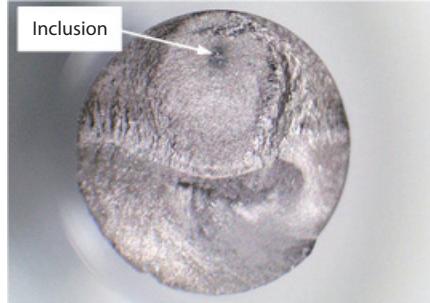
Photo of the Fractured Surface (Optical Microscope)
